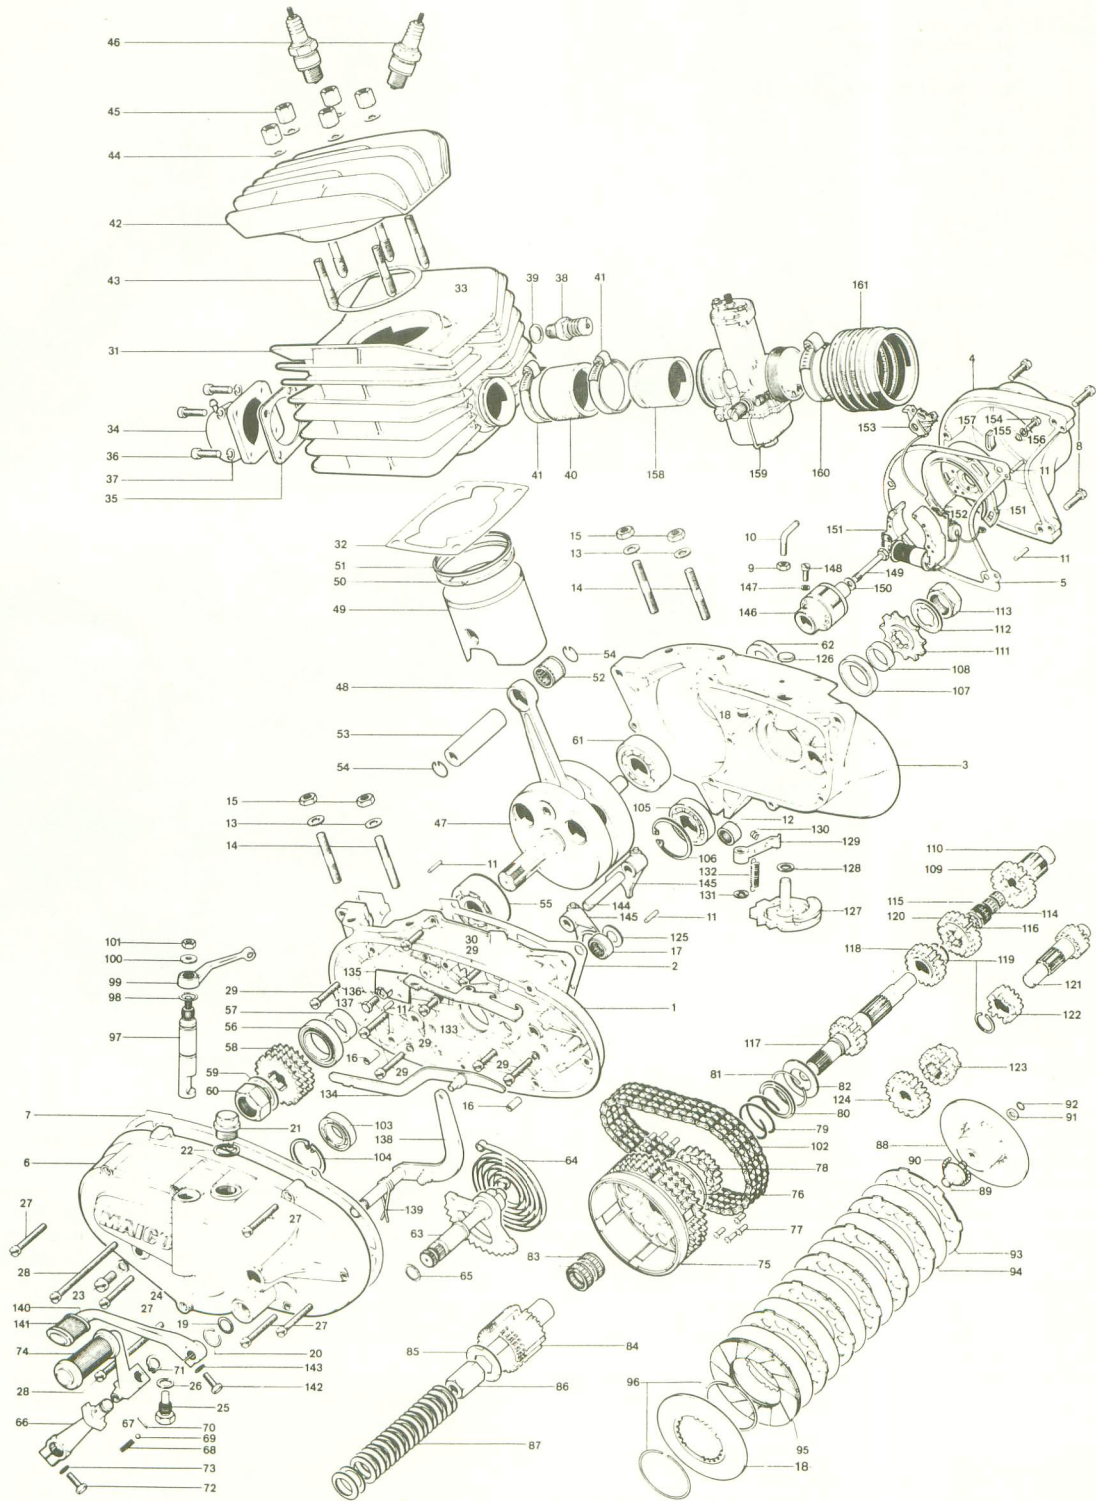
Engine/gearbox unit, 250, 400, 440 and 501 models
